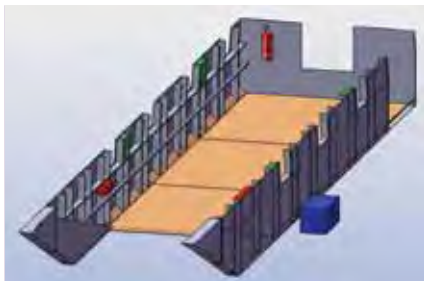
Conceptual Test Bed Interior with Steel Pans Covering Floor
